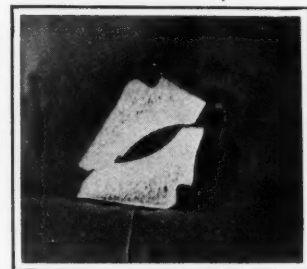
Section of Ball Races showing Appearance of Hardened Surface
